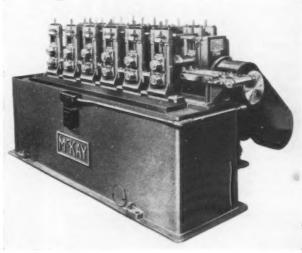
A McKay strip-forming machine from the range now being built in this country. These machines are suitable for forming flat strip into a wide variety of shapes
